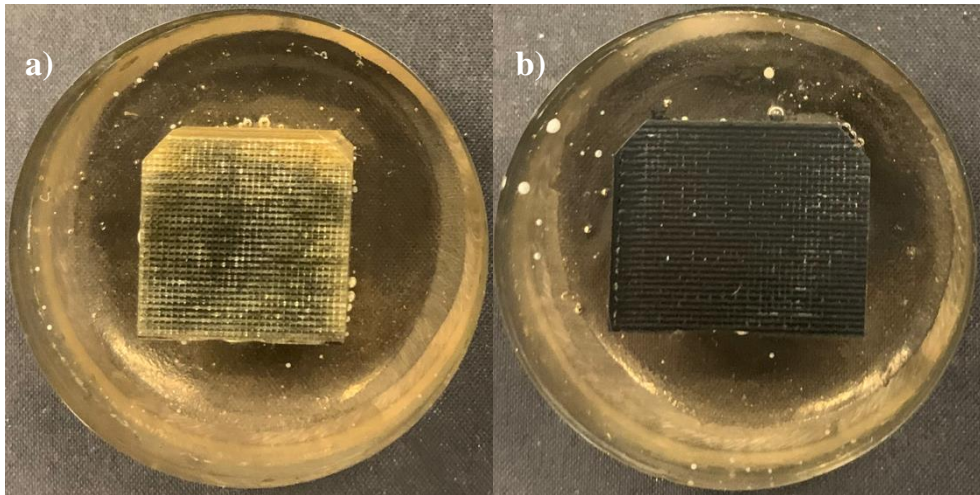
a) Ultem 1010 and b) Nylon 12 CF specimens cut to view cross section and cast in epoxy.
